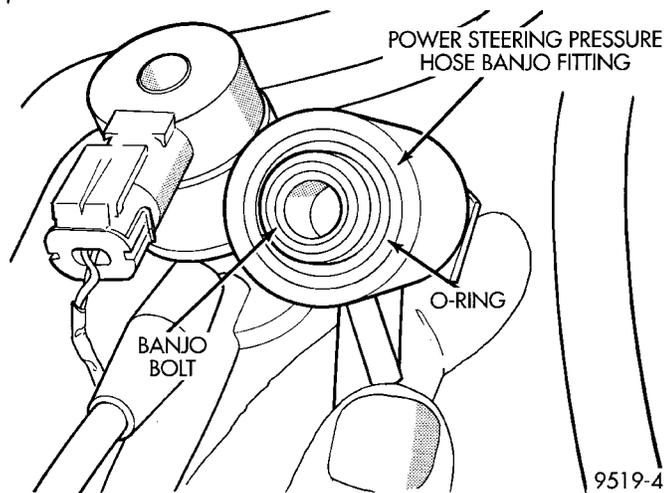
O-Ring Installed On Power Steering Hose Banjo Fitting
